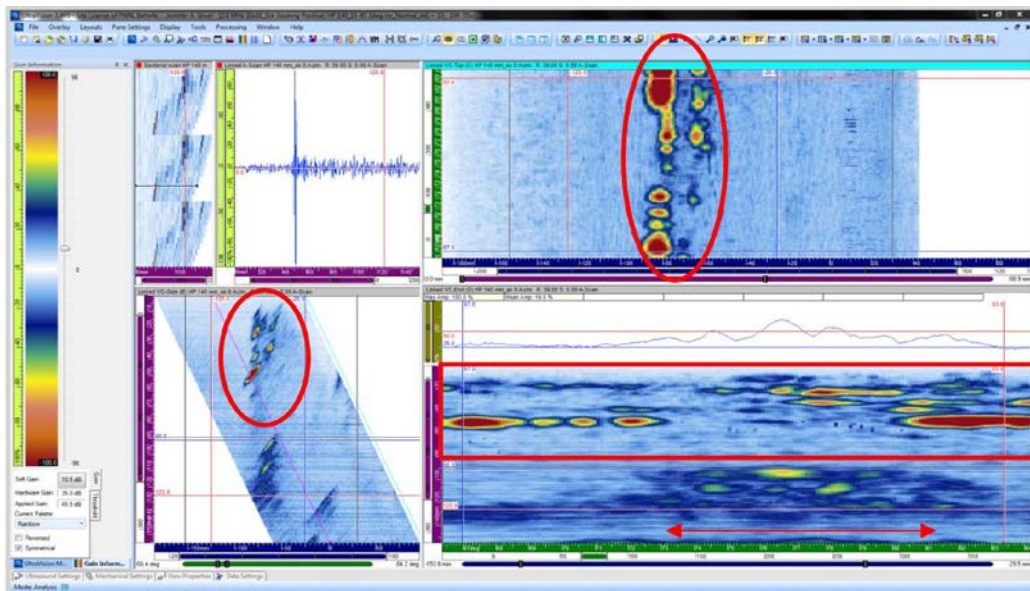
Looking Positive Skew 0 View of Circumferential Flaw 3 DM-05 (indicated by red arrow) with Weld Fabrication Flaws Circled in Red
